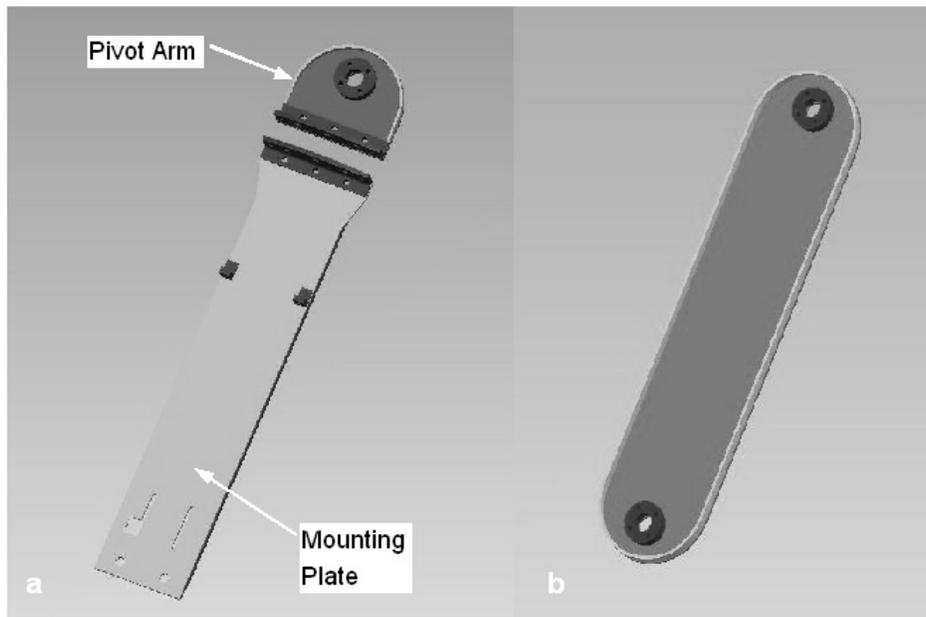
Nozzle Bracket Arms. a) New design and b) Old design.
